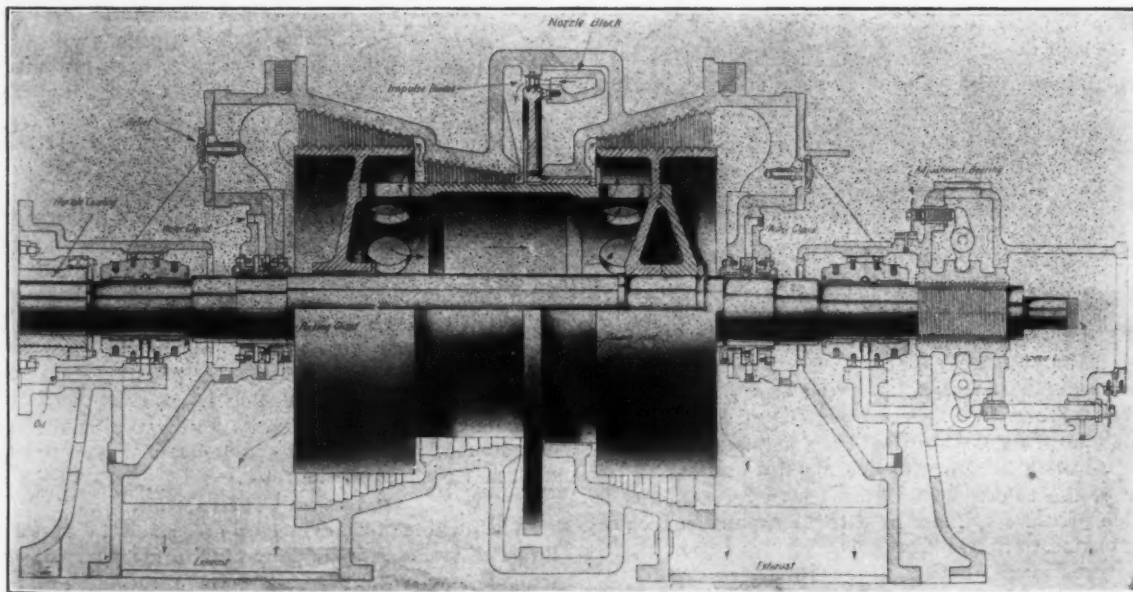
Sectional View of a High Pressure Double Flow Turbine.
